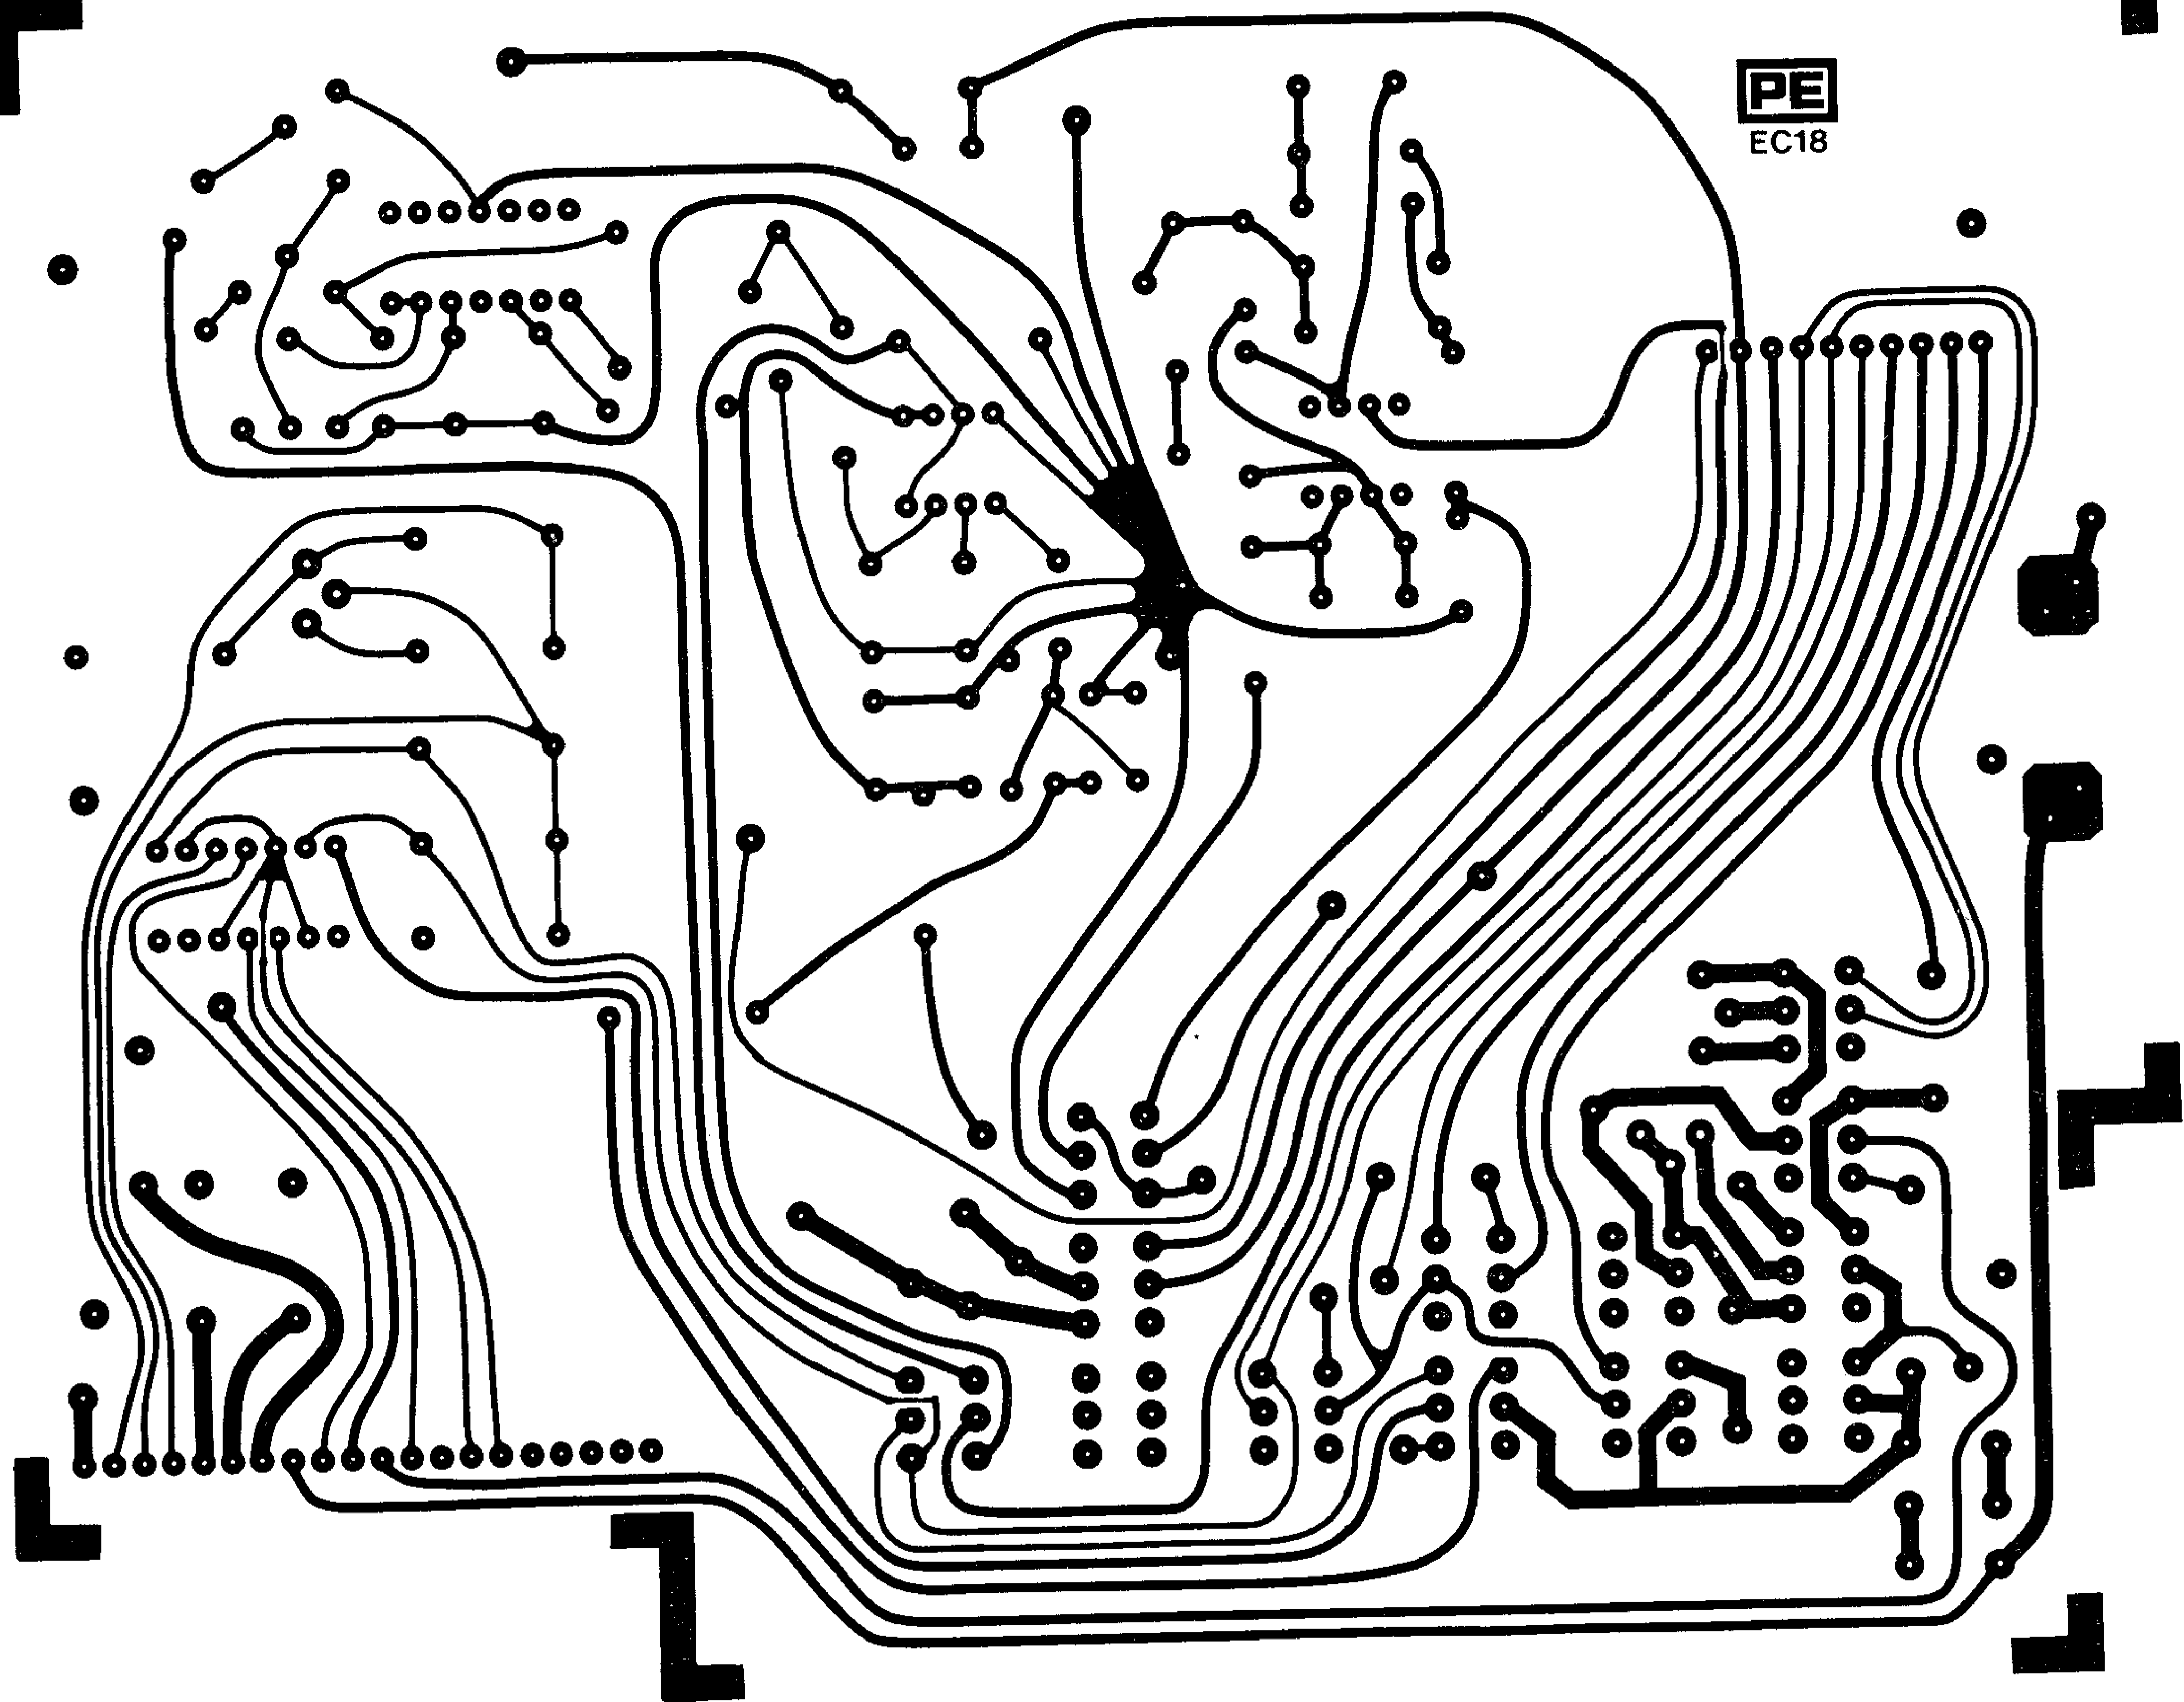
Main Board p.c.b. (copper side, actual size)
